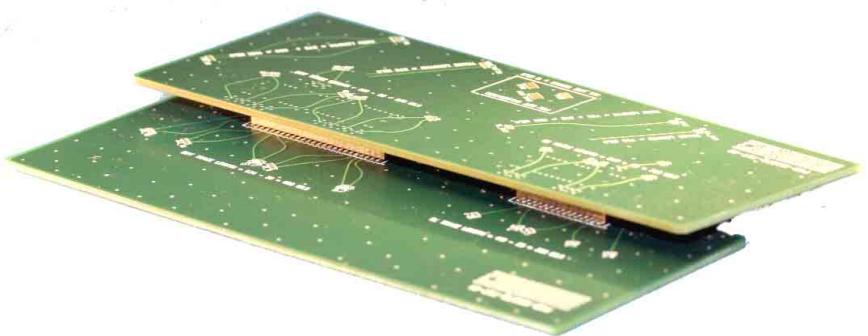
Mated PCB Test Fixture with Mounted Test Connectors
